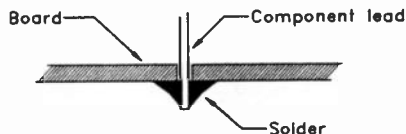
A good soldered joint has good symmetry, and is a sort of mountain shape.
